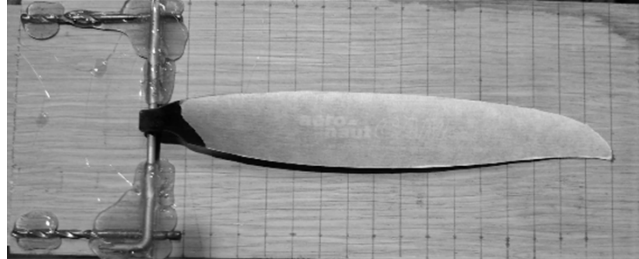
Aeronaut Camcarbon 15x8 blade fixed to a rectangular board with 1cm spacing parallel lines
